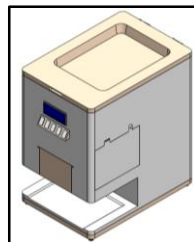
Full Assembly of Cooked Rice Dispenser Device
